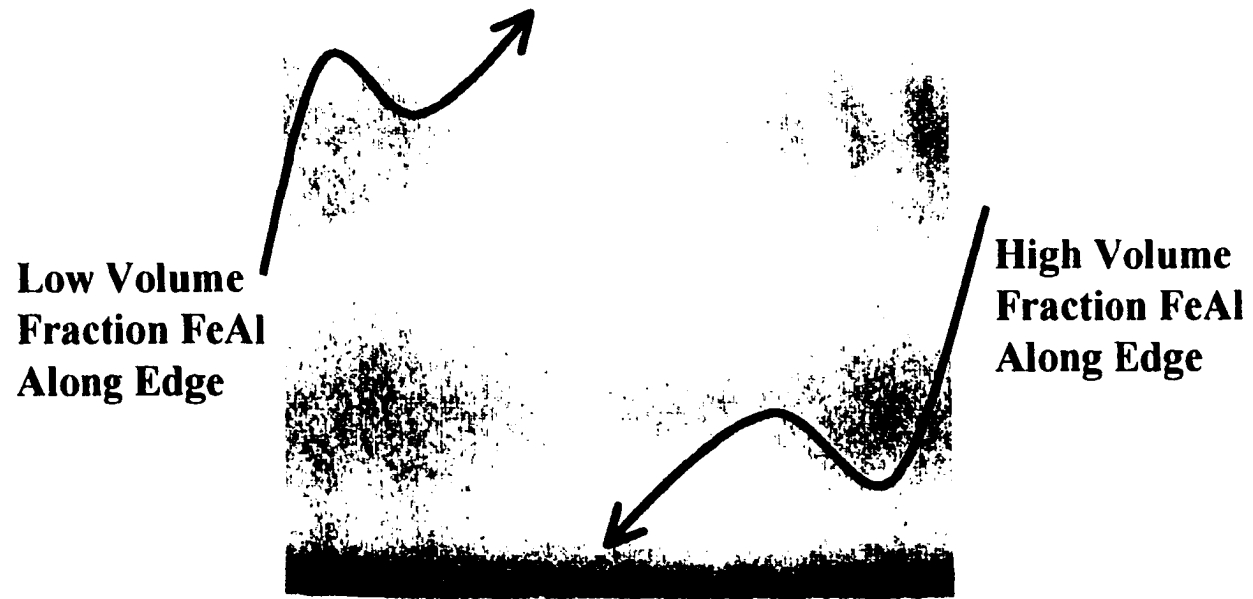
Asymmetry of green sheet edge due to roller misalignment. The specimen is sheet 23 at position 30.
